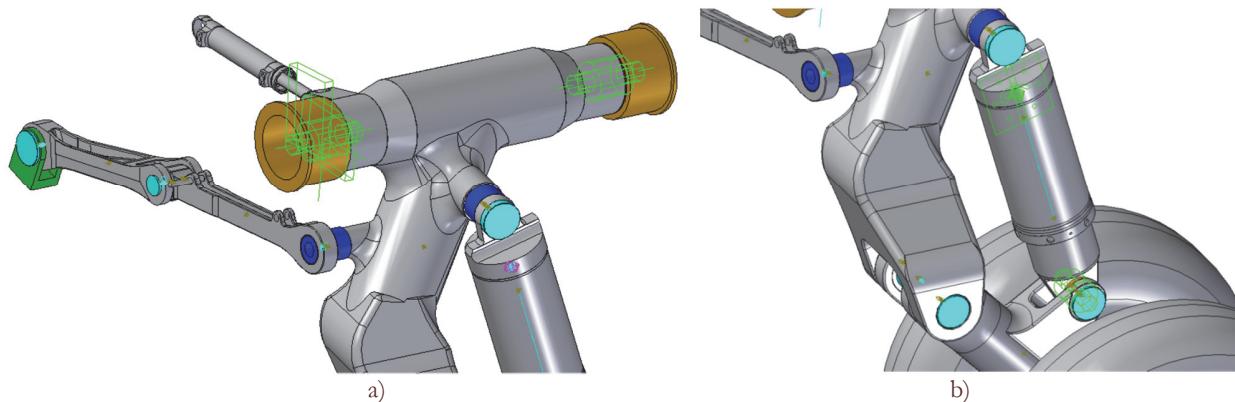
Revolute joints between: a) main fitting and the support fixture; b) main fitting, trailing arm and shock absorber.
